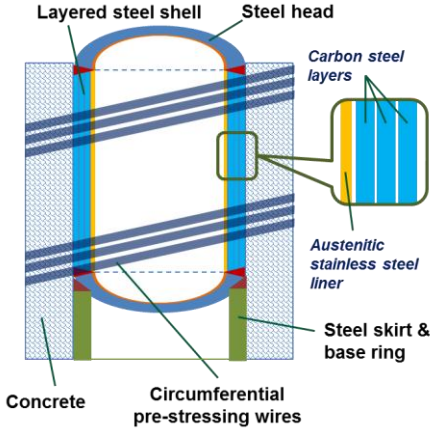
Schematic of a novel steel/concrete composite vessel (SCCV) design comprised of an inner layered steel vessel and an outer pre-stressed concrete enclosure.
